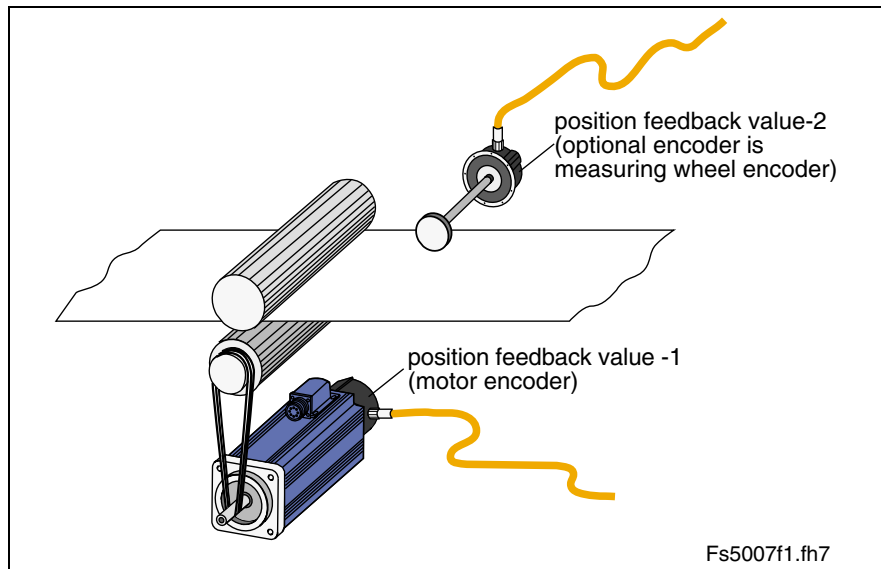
A typical arrangement of drive with measuring wheel encoder
